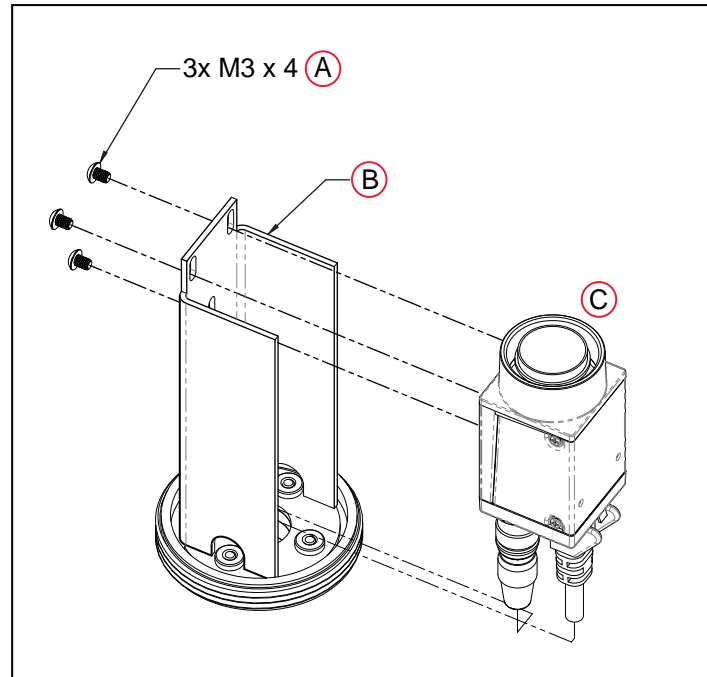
Attaching Camera to Camera Bracket, (A) Button Head Cap Screws, (B) Camera Mounting Bracket, and (C) Camera (units are mm)
